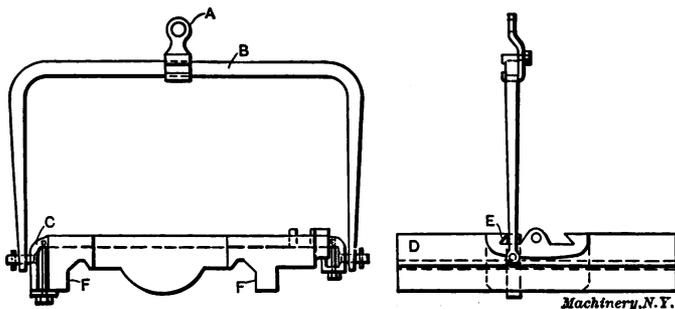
Sling for Lifting Lathe Carriages, which is equipped with an Adjustable Crane-hook Eye
